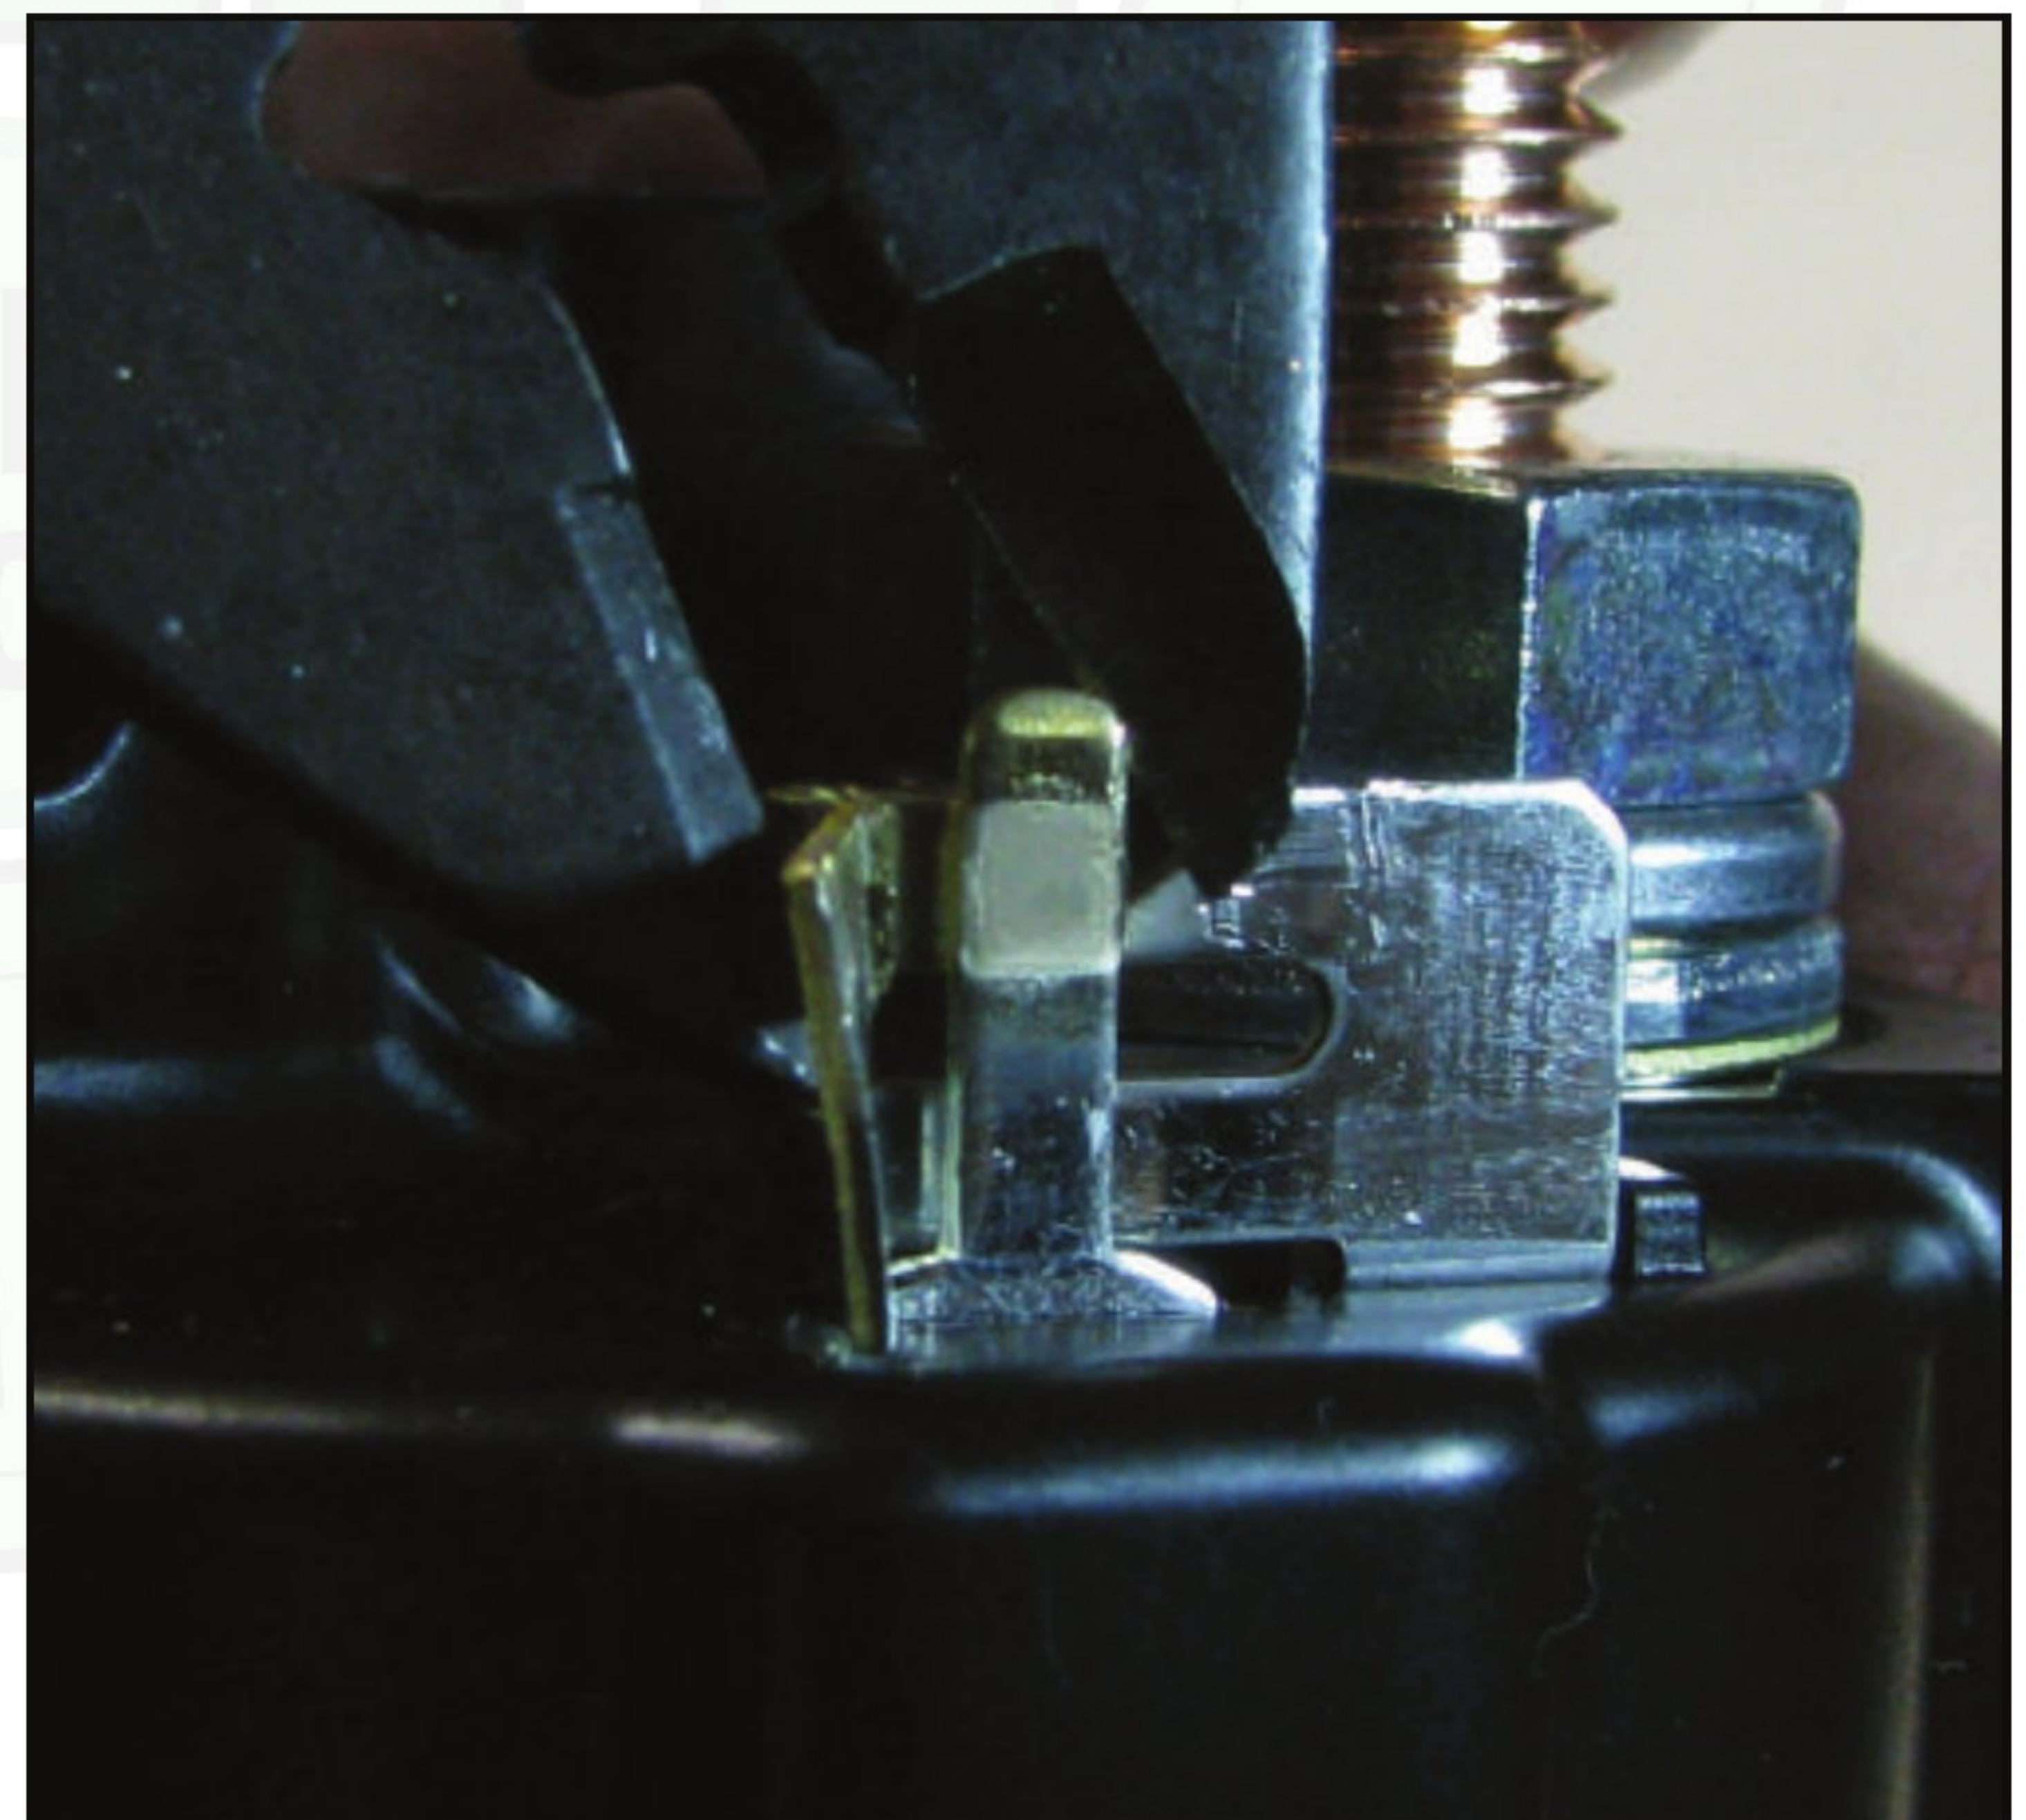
You must break the welded connection between the pull in coil and motor terminal.
